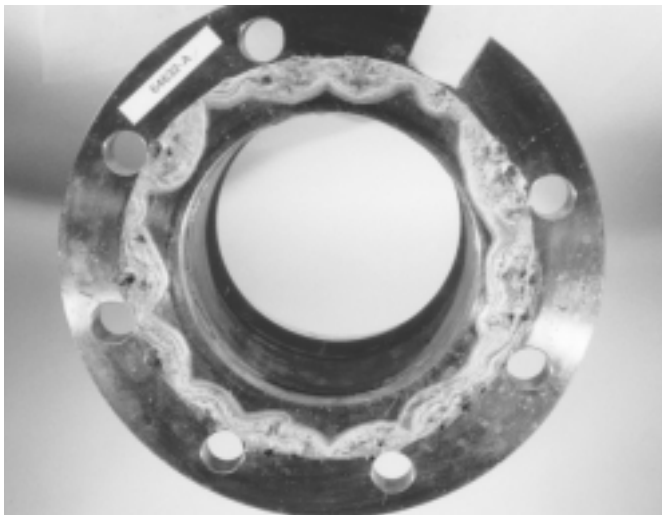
Picture showing crevice corrosion on a stainless steel flange used in fish farming in Norway. Pumped liquid: sea water.
